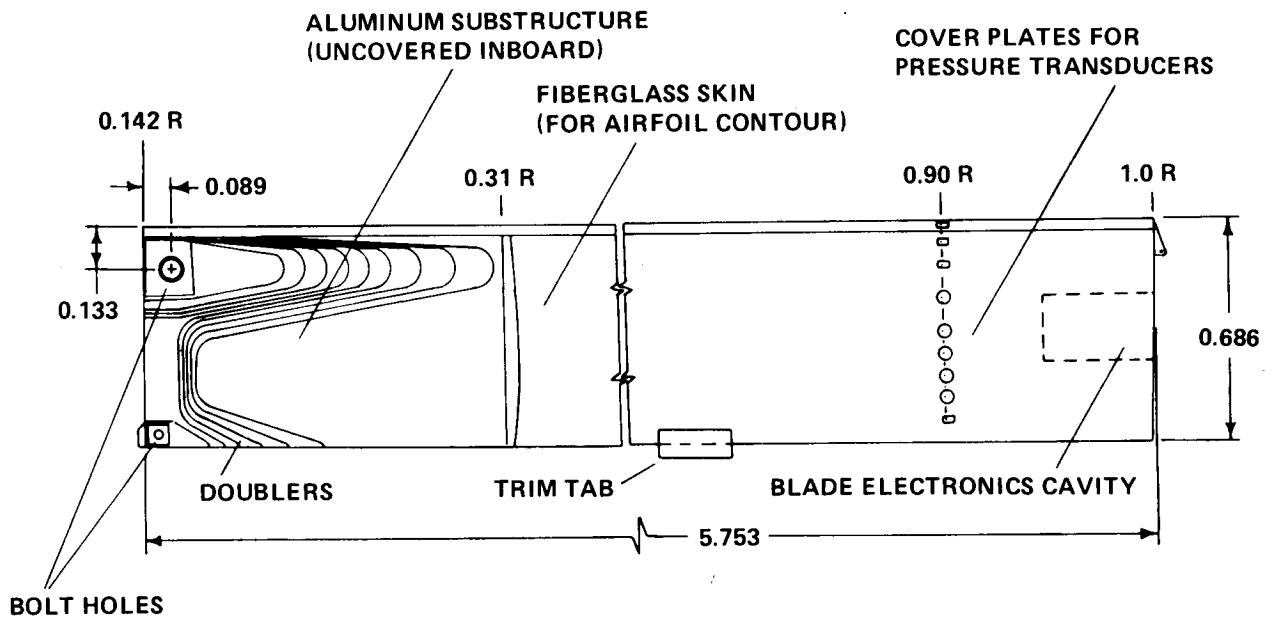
Planform of AH-1G main-rotor blade showing pressure transducer locations for airfoil tests. Dimensions in meters.
